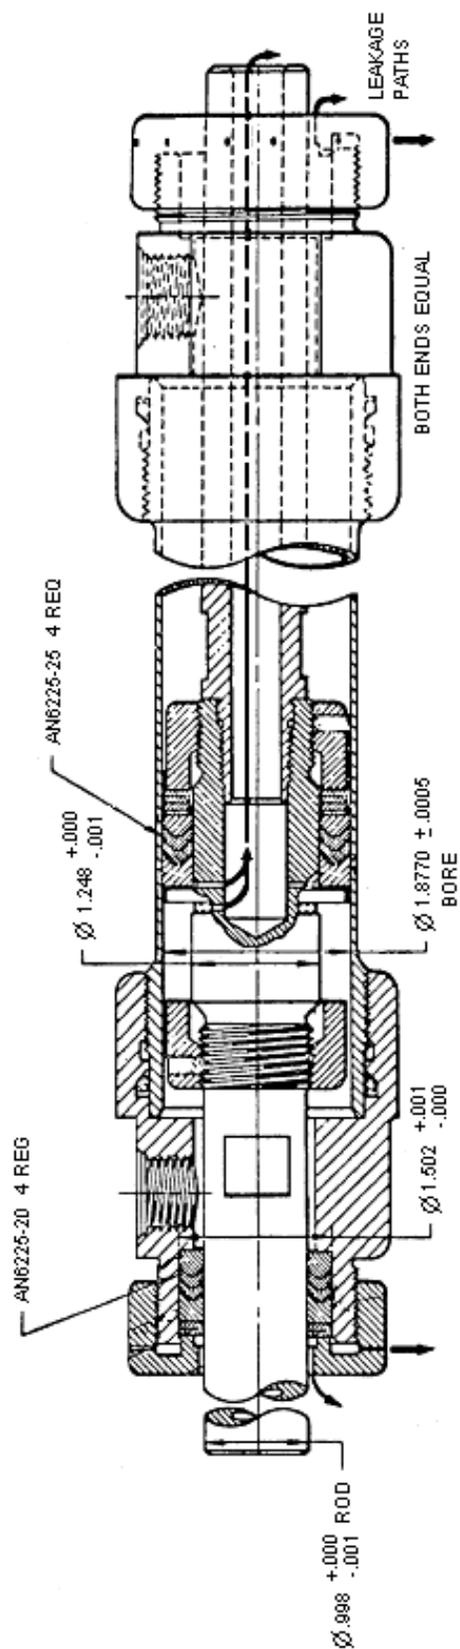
(sheet 1 of 2). Tools and method for inspection of V-ring diameter.
